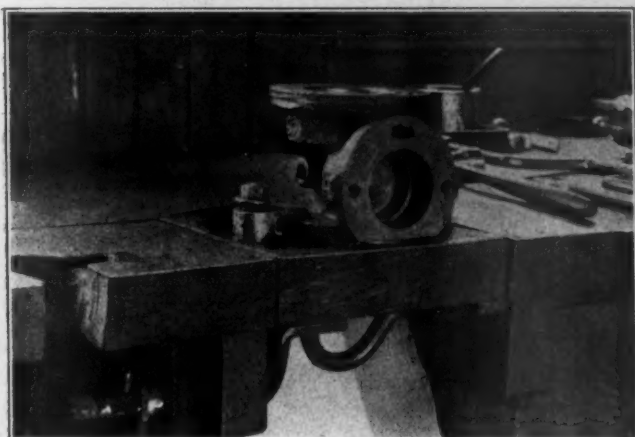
CHECK VALVE CASE AND CYLINDER CAP REMOVED.
